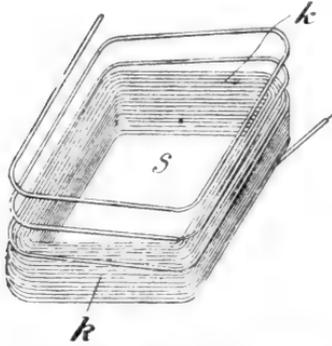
Siemens' Form-wound Coil for Hand Assembling in Slots.
